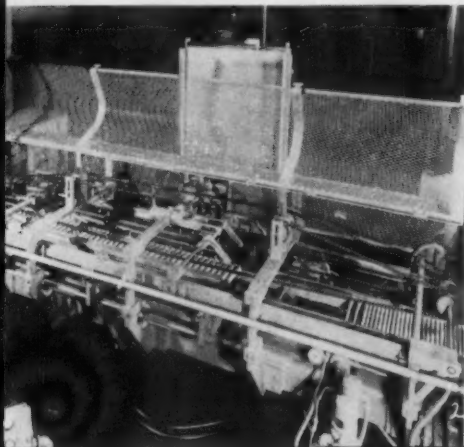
This transfer mechanism conveys, positions, and interlaces two stampings.
